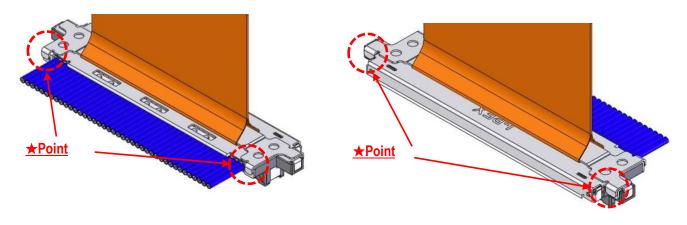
The assembly confirmation of PULL TAPE HOLDER
